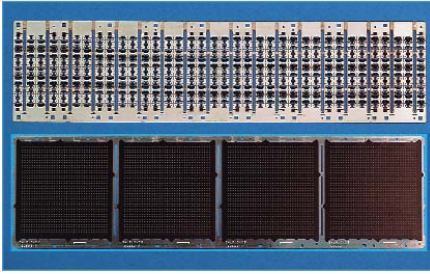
At top is an SOT-666 molded strip with 288 mold cavities; at bottom is a SOT-883 (Mini-MLP) array molded strip with 7140 units.
